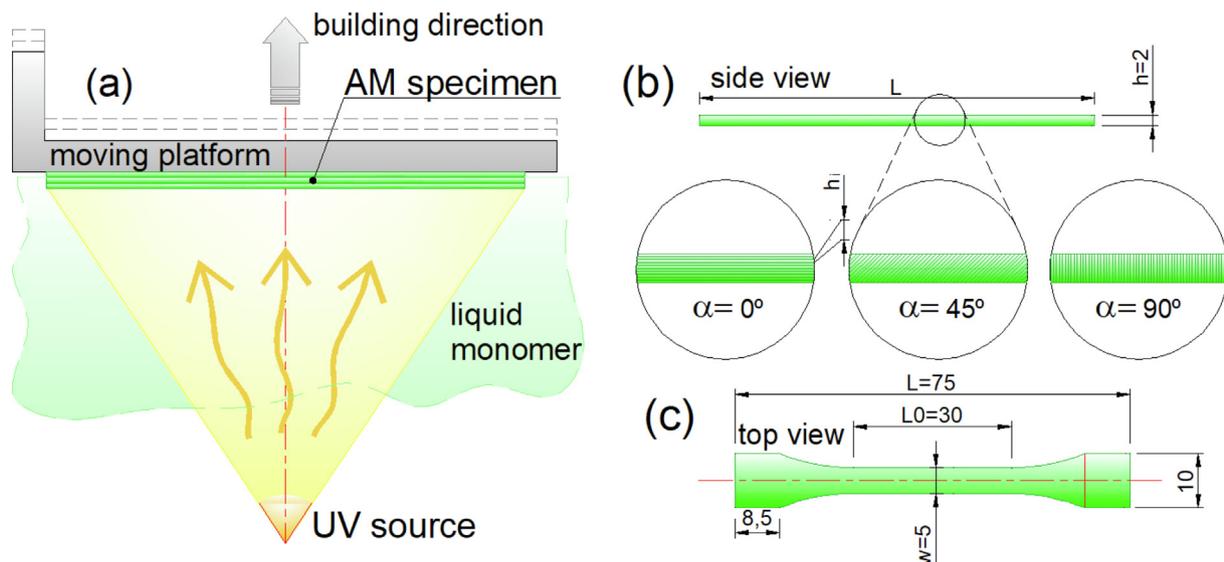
Schematic of the DLP printing process (a). Details of the printing direction and layer thickness (b). Geometric sizes of the standard tensile specimens (c).
